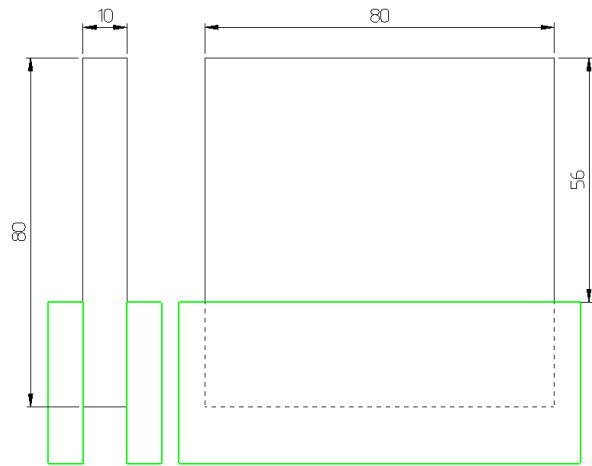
Drawing of the blank (black colour) and the clamping jaws (green colour)
